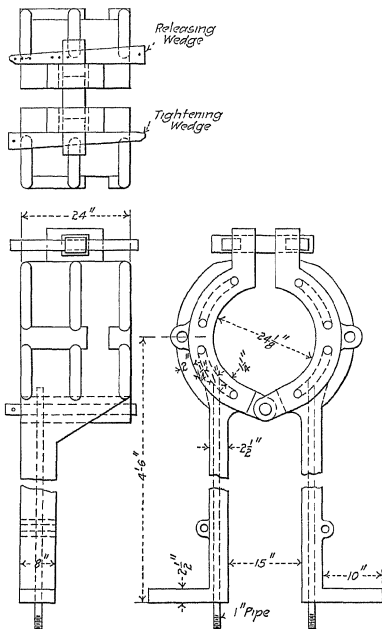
24-IN HINGE-TYPE HOLDER, FURNACE No. 2.
